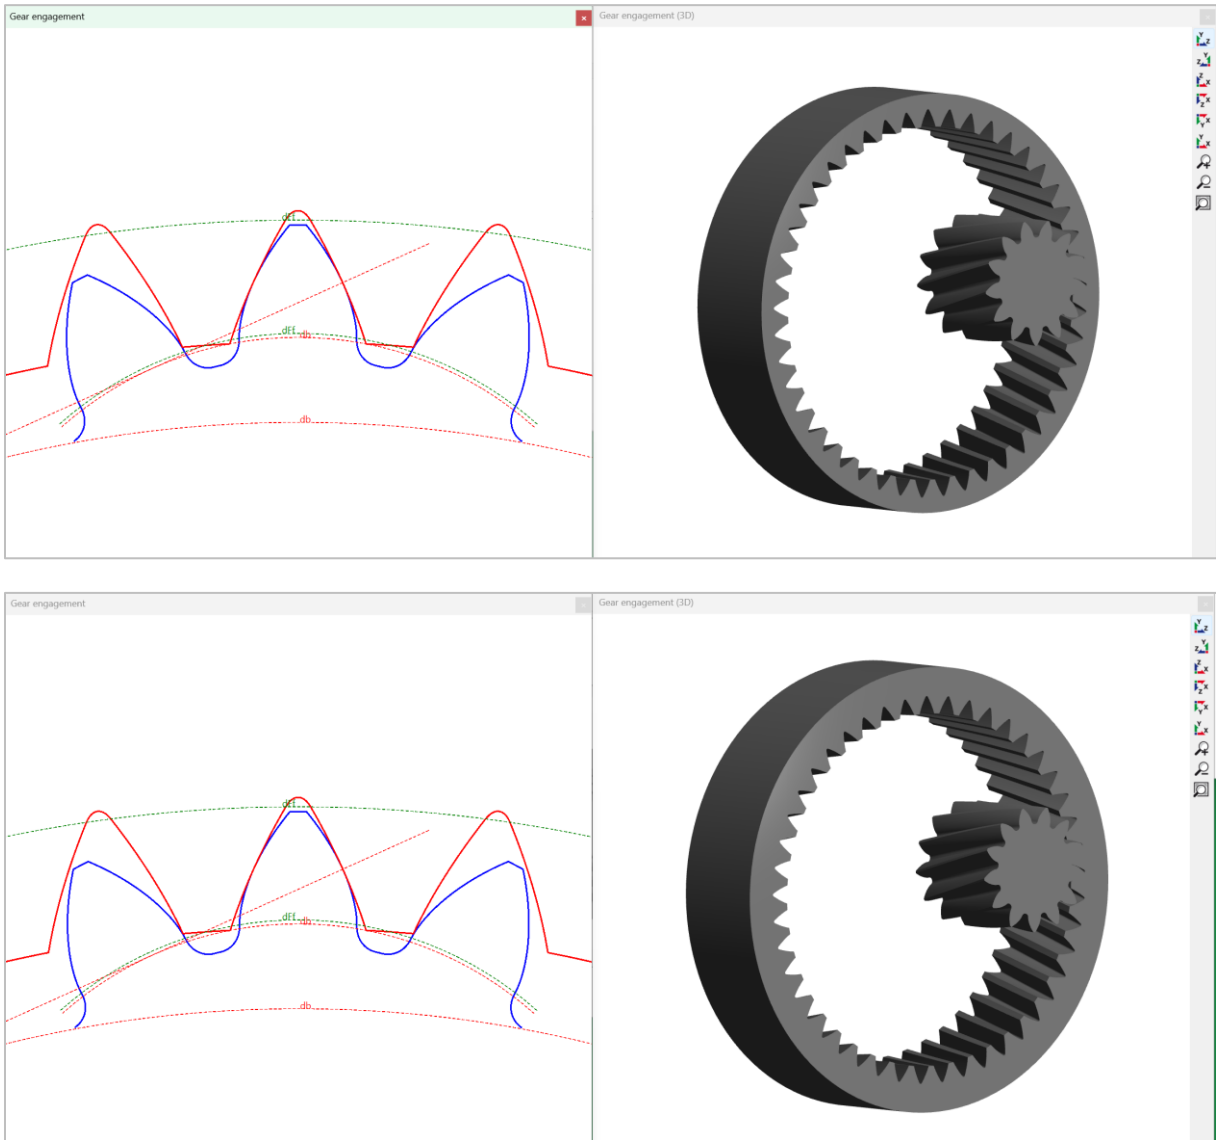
Top: Mesh and 3D geometry with original ring gear thickness. Bottom: Ring gear inner diameter set to $d_{i2} = 580.00$ mm.
